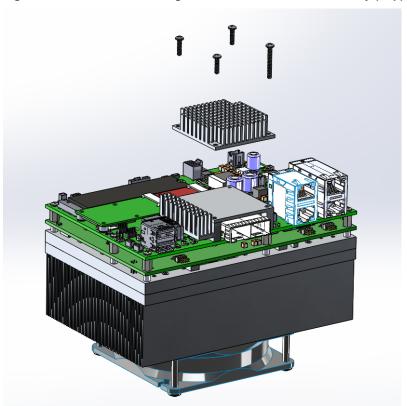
HDW-421 – Installing the Fan-Sink Thermal Accessory (Top)
